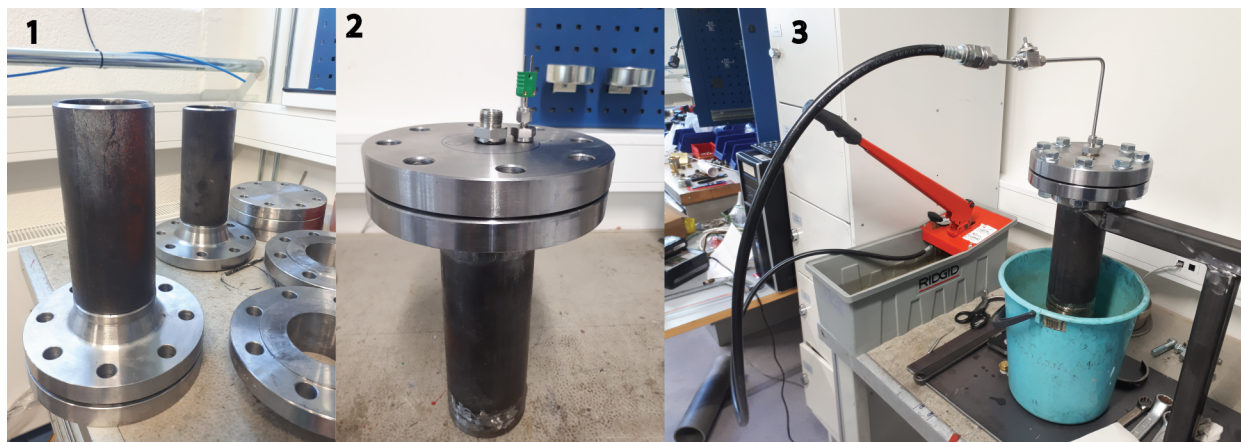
Reaction cylinder. (1. Before welding; 2. After welding; 3. Pressure test).
